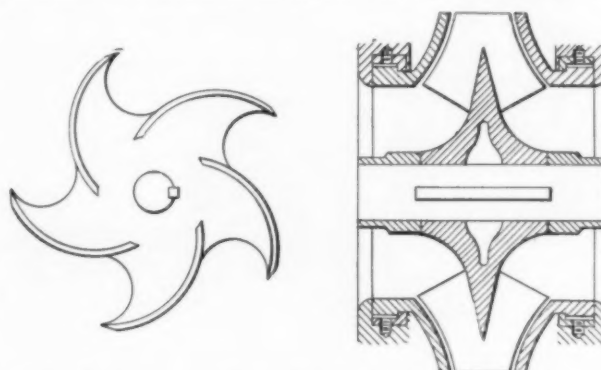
CONVENTIONAL SHARP-BLADE OPEN IMPELLER, DOUBLE SUCTION, WITH SIDE PLATES
